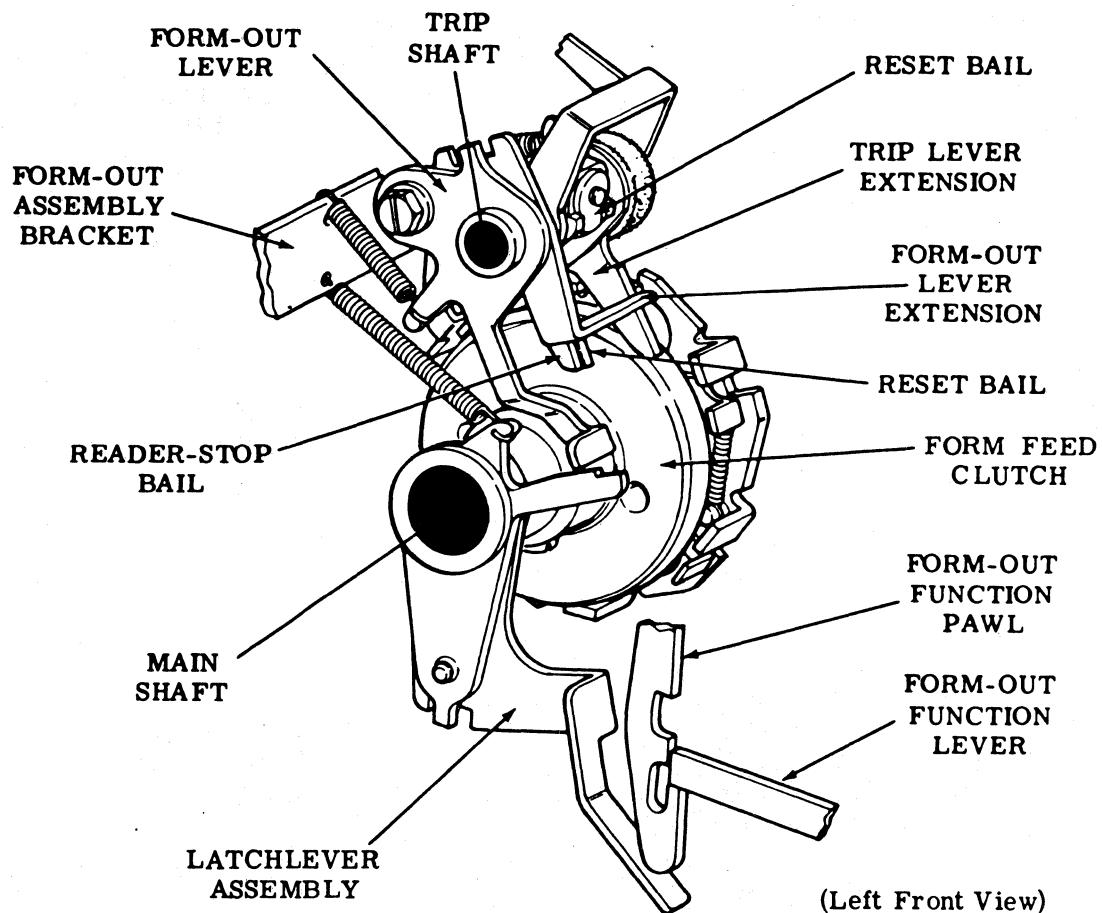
Form-Feed Mechanism (Sprocket Feed)
